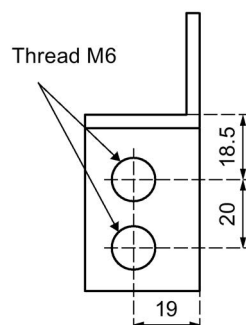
Bolting points for the mounting rails (dimensions in mm)
